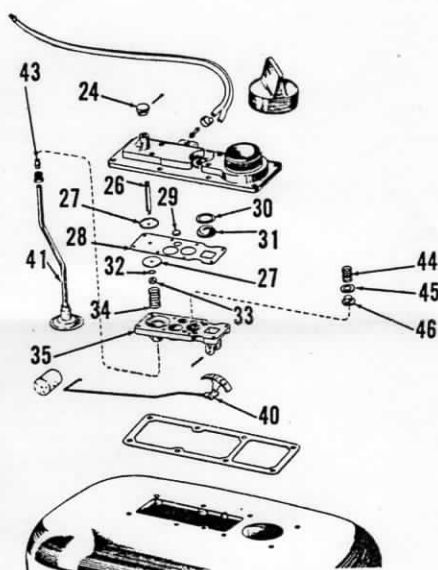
Exploded view of pressurized fuel tank assembly used on some models.
